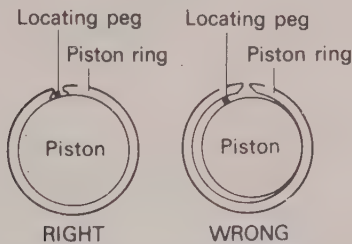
In a two-stroke, the rings are not free to rotate—they would catch in the cylinder ports if they were. Instead, each ring groove has a peg that prevents the rings from turning. When refitting rings, make sure that they engage snugly against their pegs and do not tend to ride up over them.
